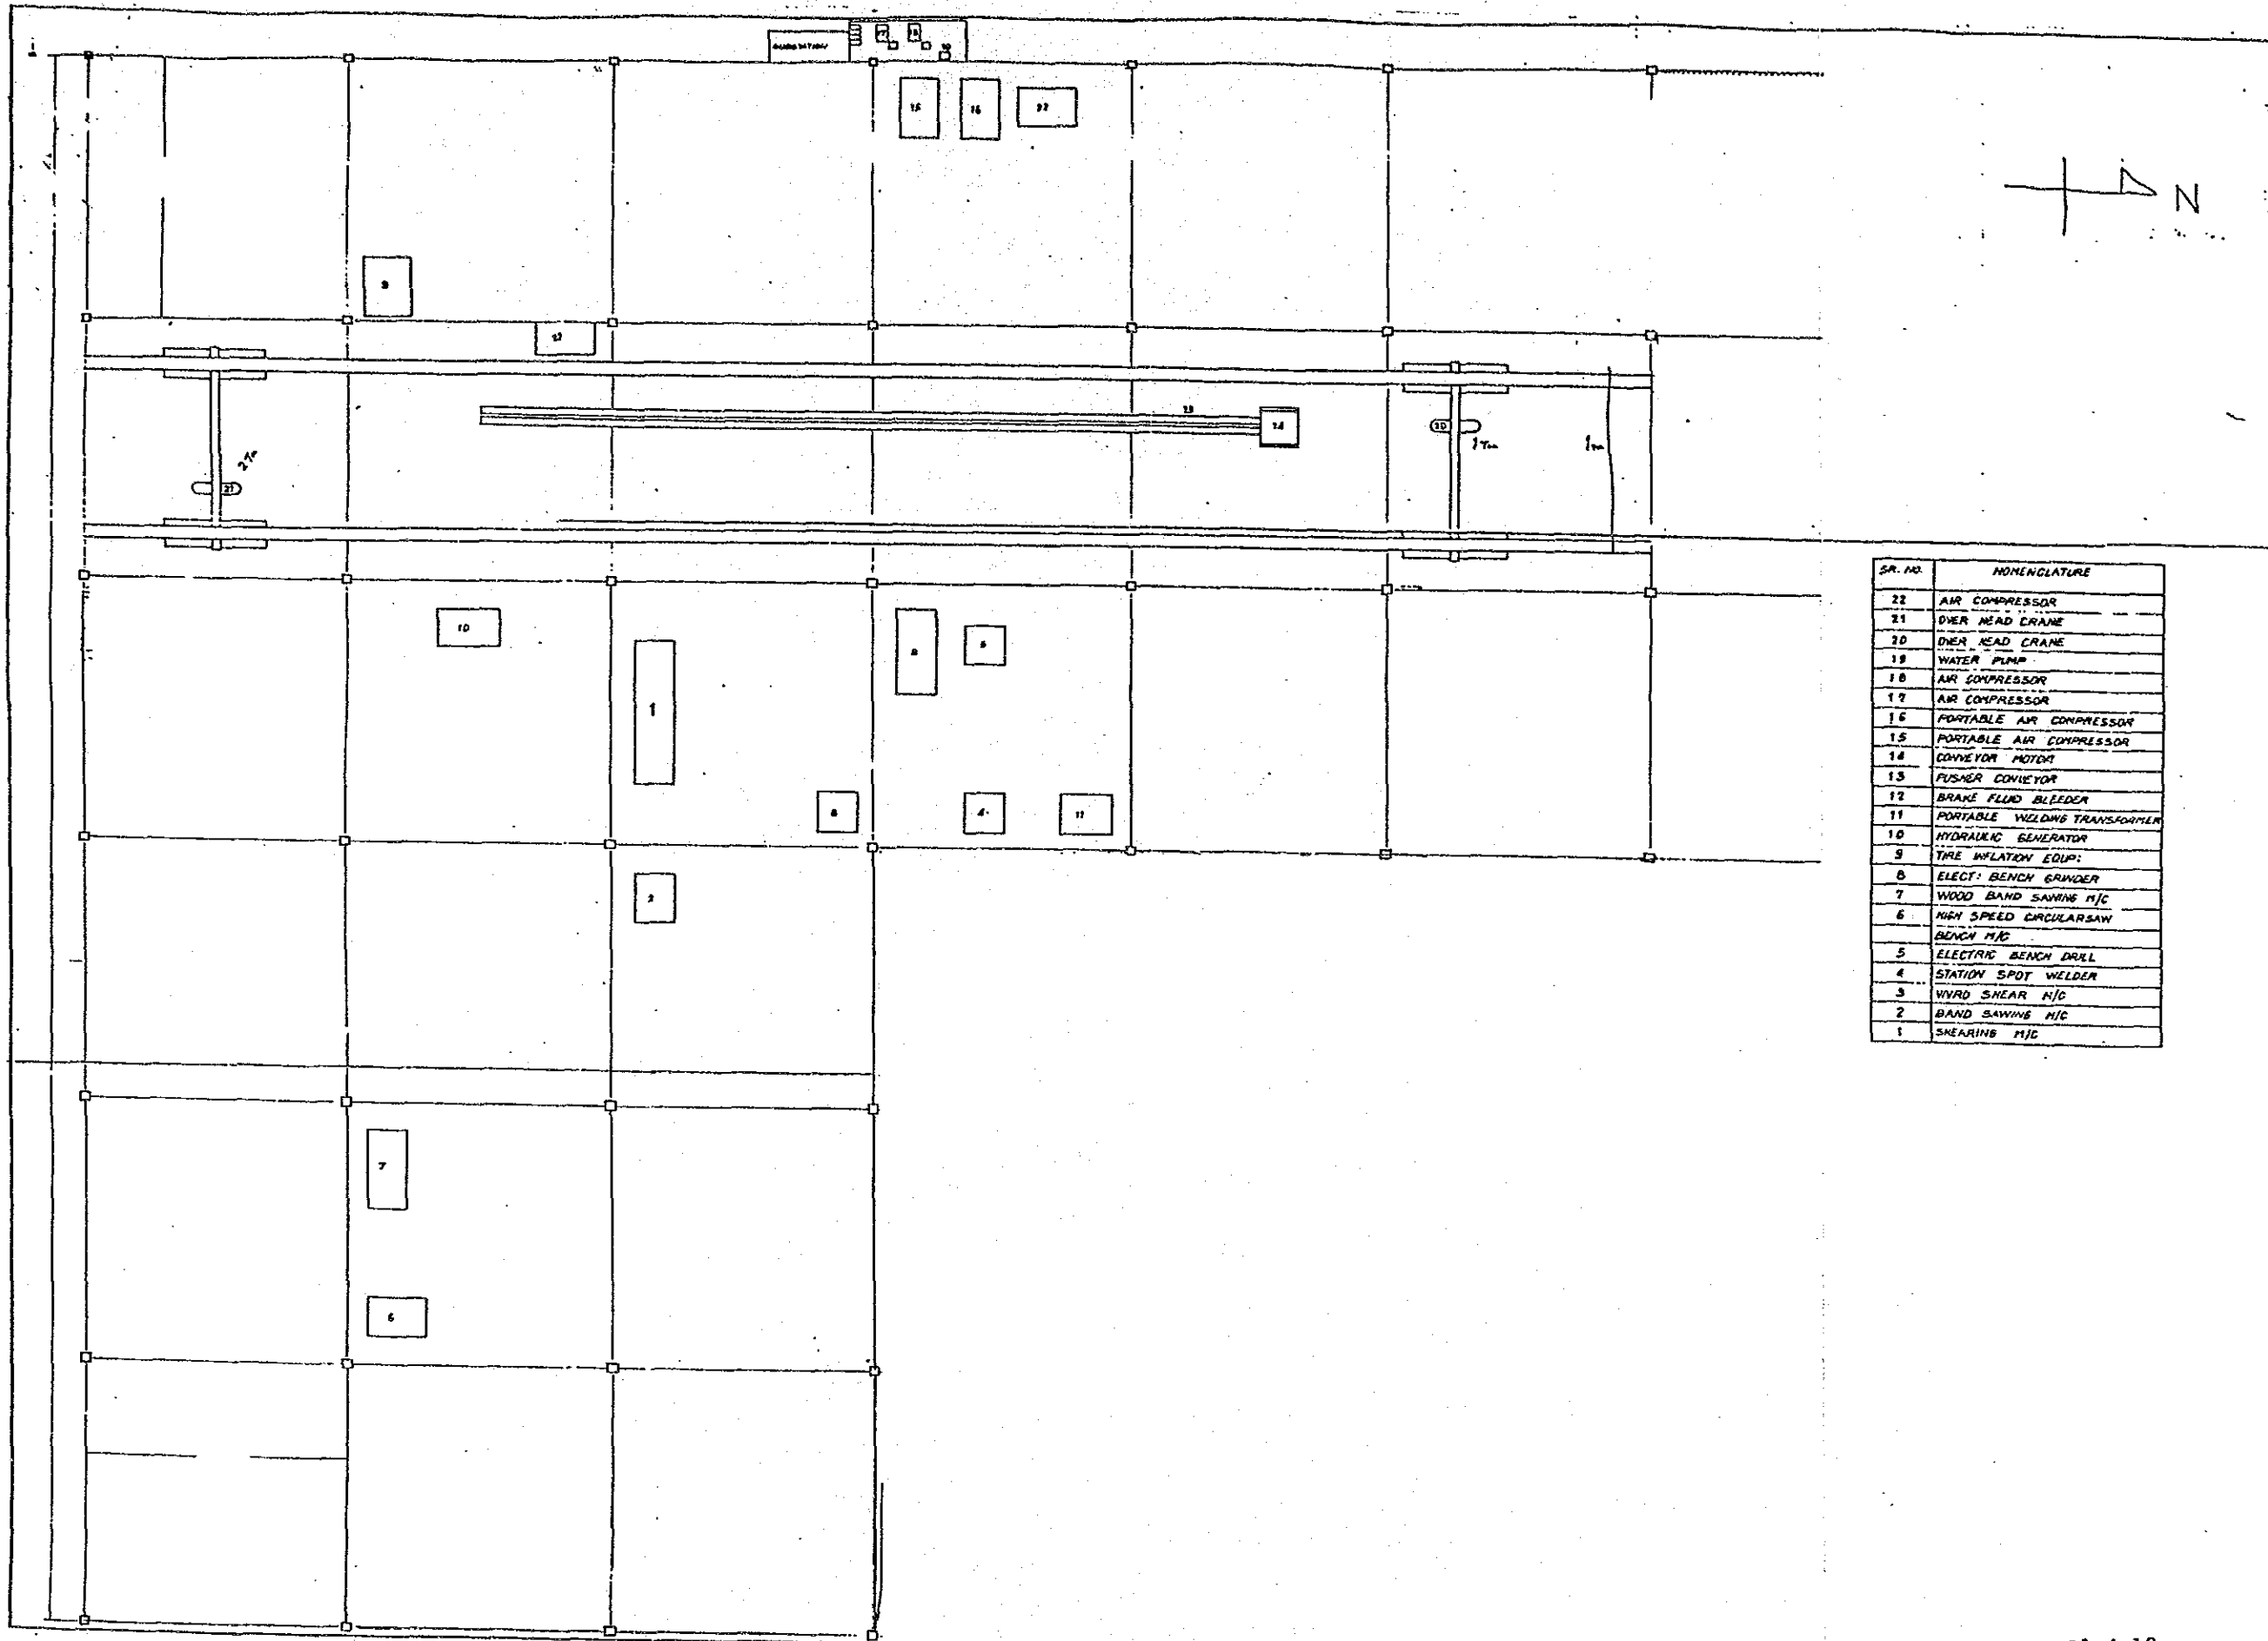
LAYOUT OF PRESS SHOP NO.2
